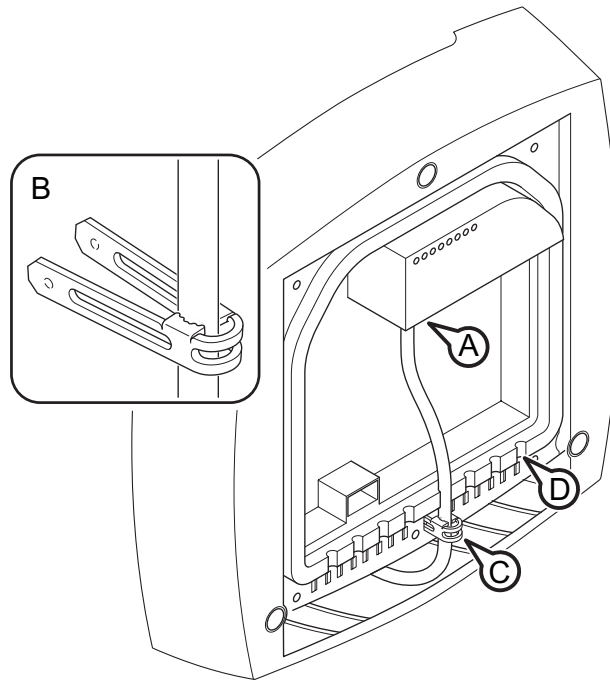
Connecting a cable and fitting the strain relief clamps
